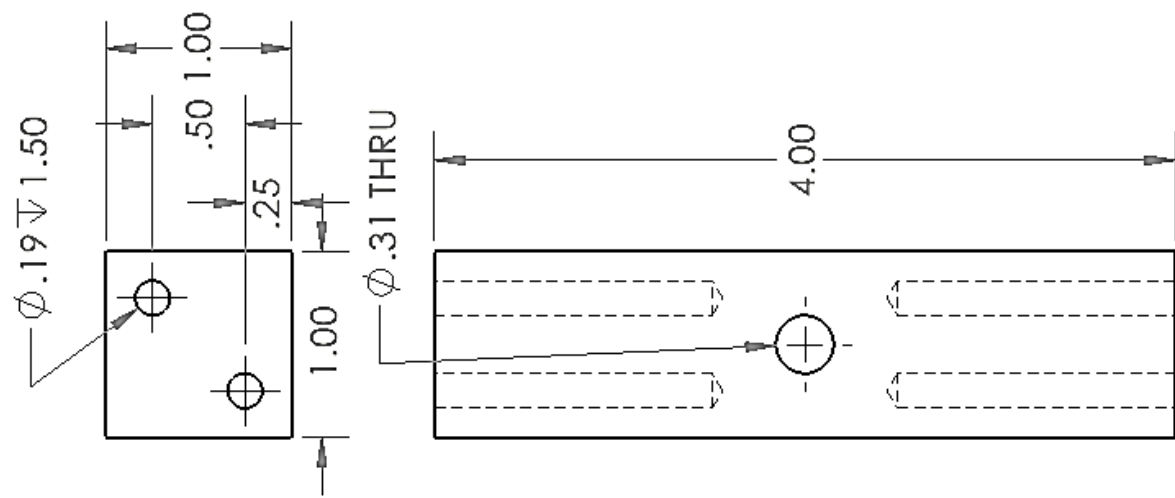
Center bar for the mounting system. The central screw is attached through the center of the bar. The facepieces bolted in two points for reinforcement.
